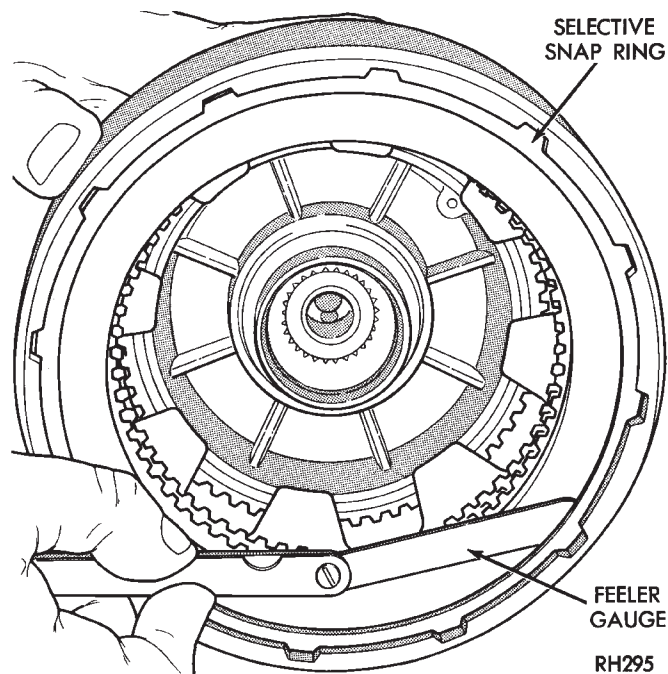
Typical Method Of Checking Rear Clutch Pack Clearance
